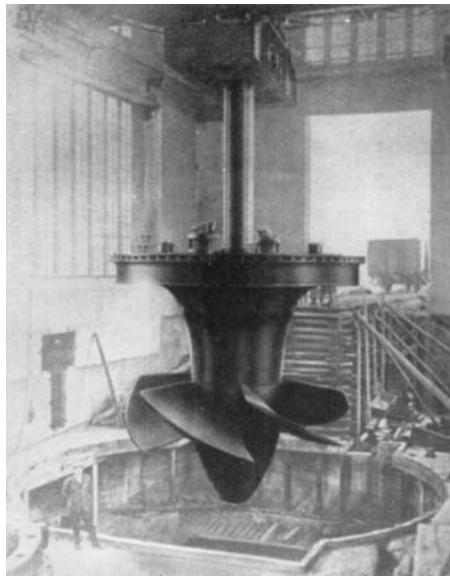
36,600 h.p. Propeller Runner and Cover
